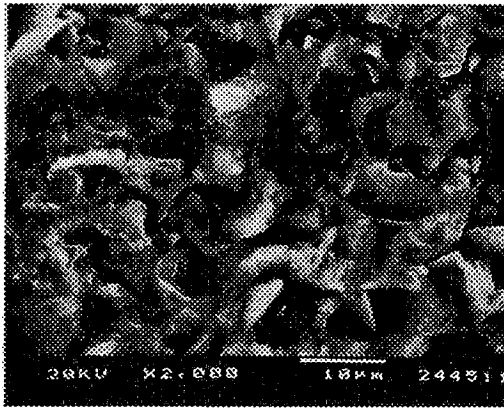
Initial Damage Zone of AWJ Machined Gr/Ep Laminate Specimen 2
